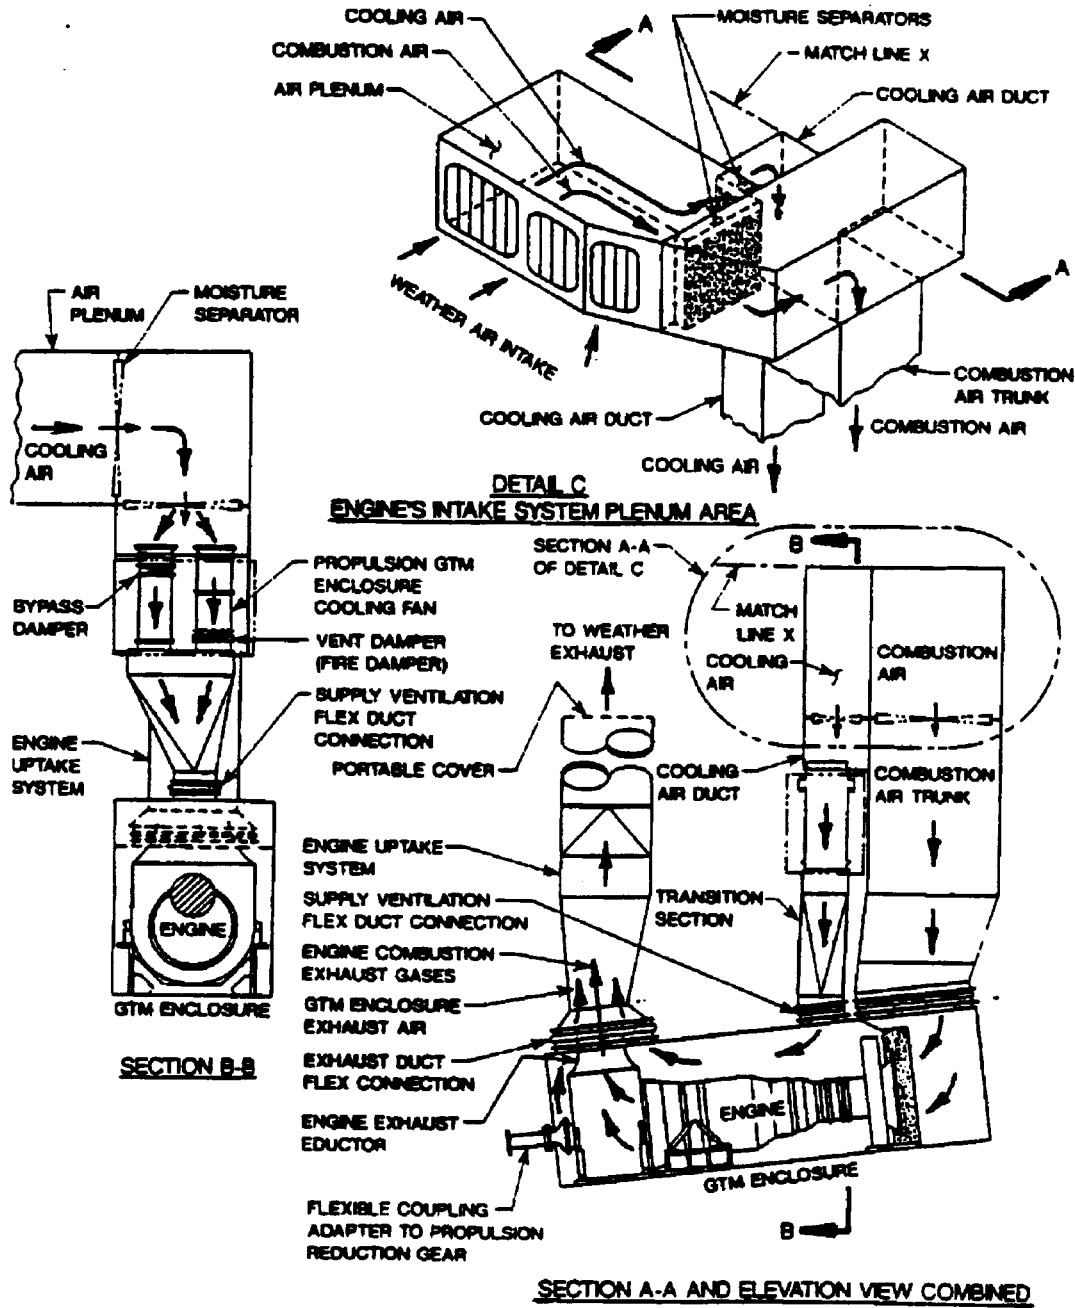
Typical Propulsion GTM Enclosure Cooling Design Configuration No. 1
